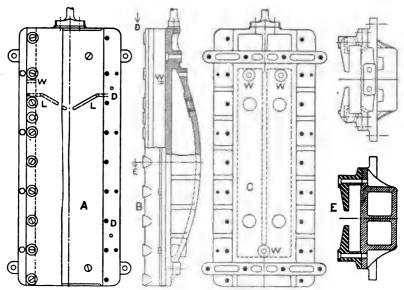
Guide for Warship Engine, with frame of steel columns; cross-head in Fig. 295. Scale 1 to 24.
